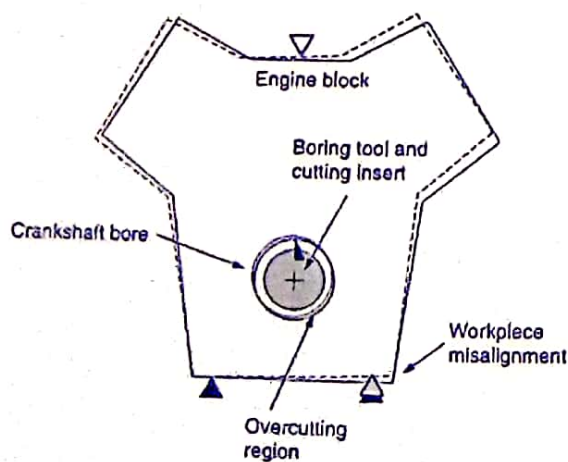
Nonuniform depth of cut due to workpiece misalignment error.<sup>25</sup>
